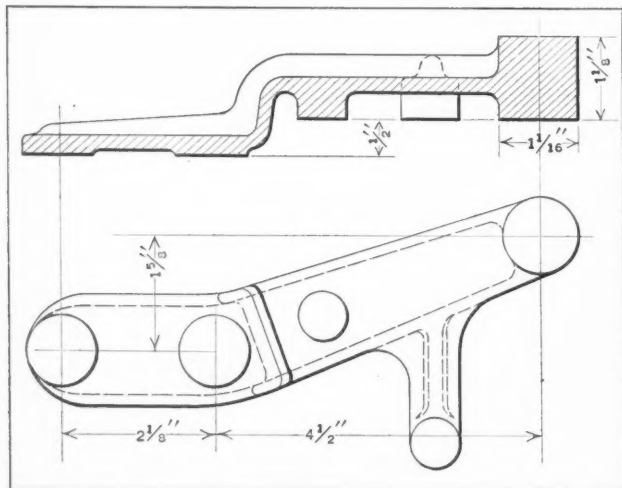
Bracket Having Five Bosses Produced Parallel and to Specified Dimensions in a Coining Press
